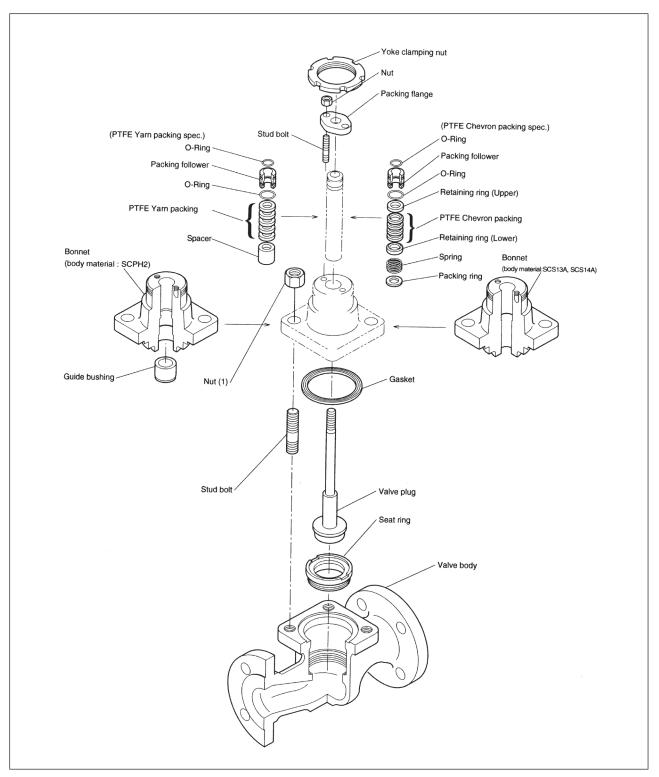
Model AGVB Control Valve (Available body sizes: 1-1/2 inches, 2 inches)
